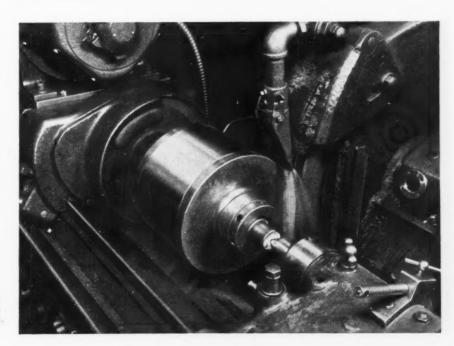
The outer periphery of castiron bearing shells is ground within a tolerance of 0.001 inch on the fixture here illustrated.
